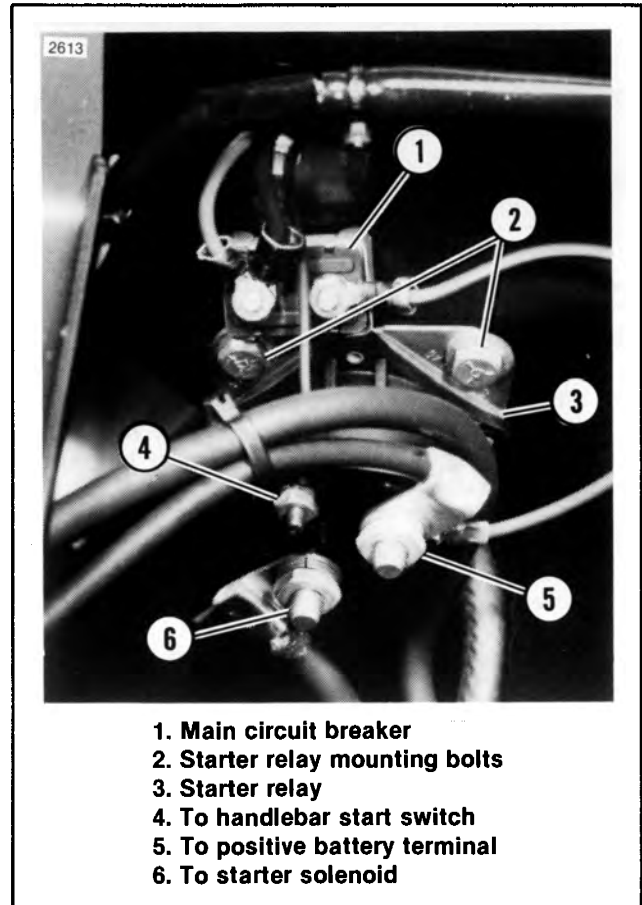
Starter Relay Mounting and Connections Early 1985 — FLT (Seat Removed)
